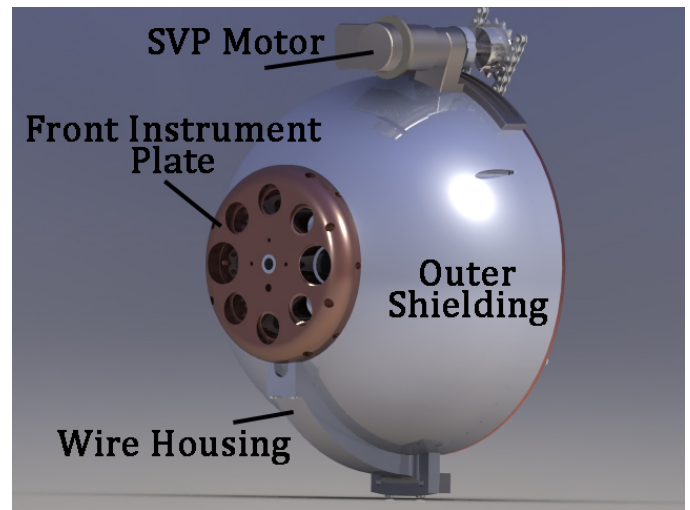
Front view of the HGRFA to show the front instrument plate design as well as the wire housing.
